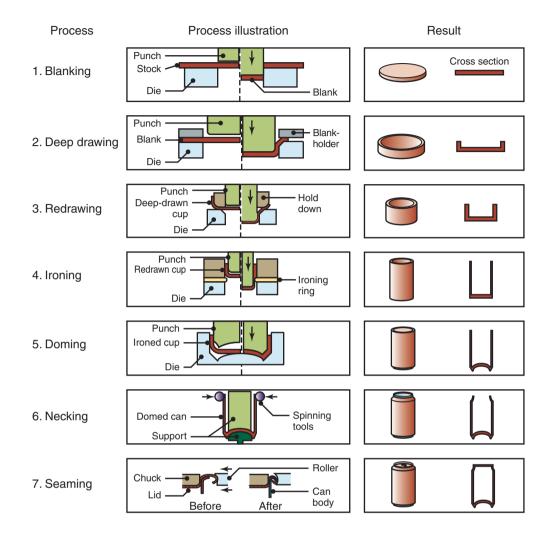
The metal-forming processes involved in manufacturing two-piece aluminum beverage cans.
